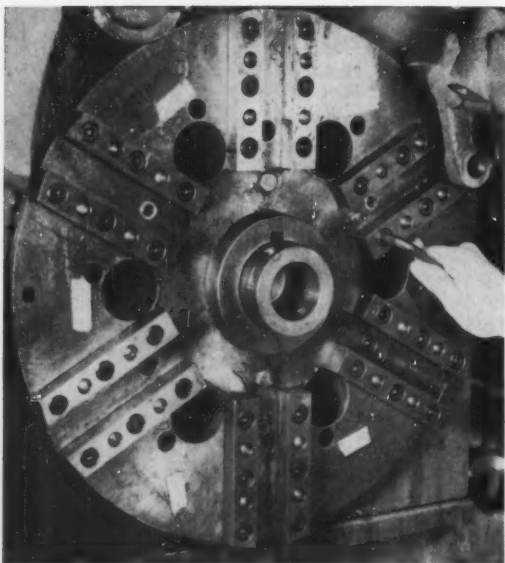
Recessed socket cap screws used as fasteners on the end plate of an automatic screw machine. Design allows smooth revolving surfaces, without danger from protruding screw heads.
